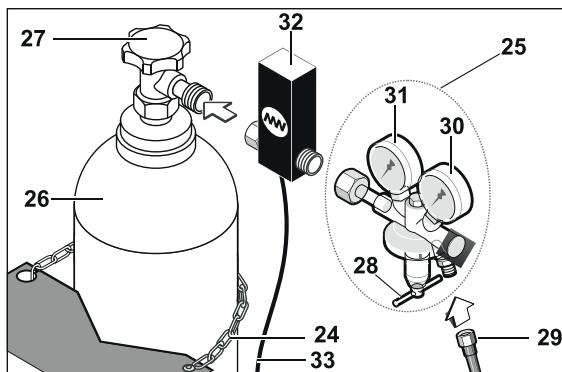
Connections Gas Cylinder - Heater - Pressure Regulator
